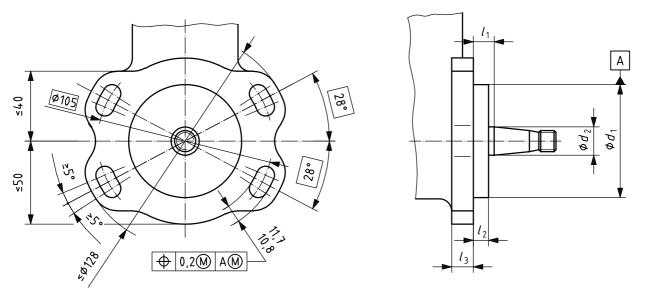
Fuel injection pumps — Type 7 end-mounting flange
